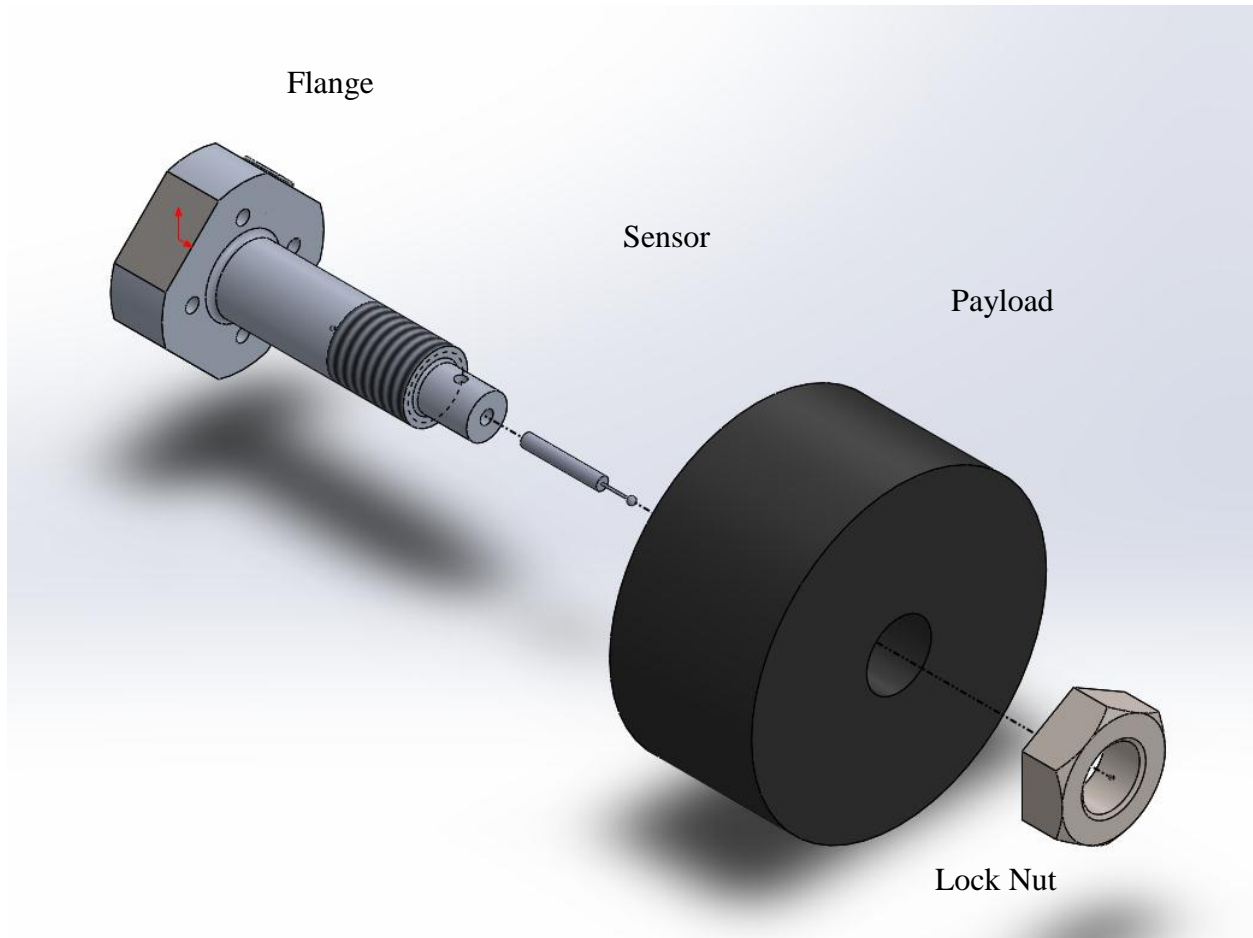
Sensor fixture design shown with representative sensor, payload, and locking nut.
